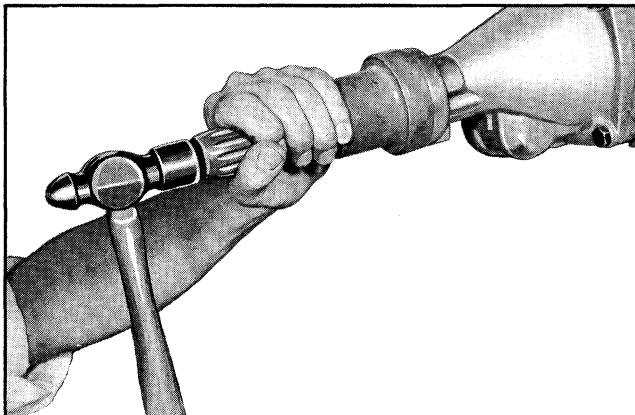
B-31 Installing Rear Bearing Retainer Oil Seal
